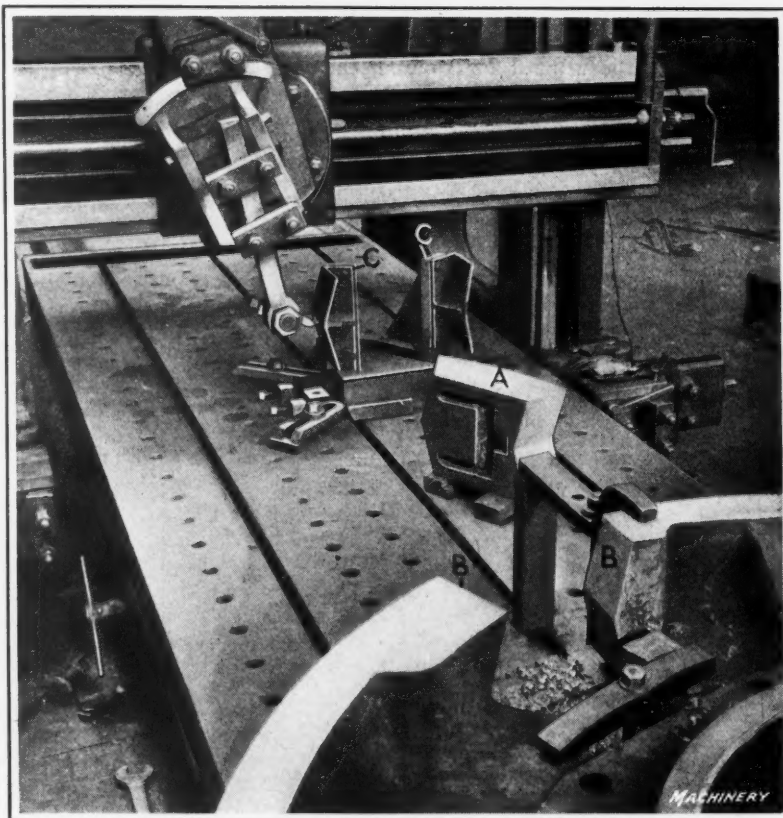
Close-up View of Work shown in Fig. 8 and of the Removable Segment
